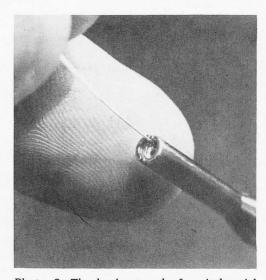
The business end of an industrial quality wire wrap tool is the bit and sleeve assembly. The bit is driven by a high speed motor (or hand operated mechanism) and rotates around the post to be wrapped. The center of the bit has an alignment hole which fits over the wire wrap post to guide the operation. The bit also has a groove along its length into which the stripped end of a wire is inserted as shown. The wire is held in the groove by the sleeve and is pulled out during the process of wrapping. The sleeve itself does not rotate and is held rigidly in position.
